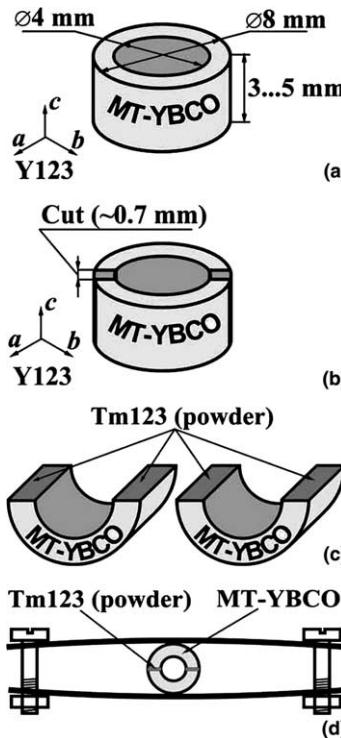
Experimental details of the process of soldering: (a) initial ring drilled from a single-domain material; (b) ring cut along the diameter; (c) places of future soldering covered with powdered Tm123 by sieving; (d) ring arranged for soldering.
